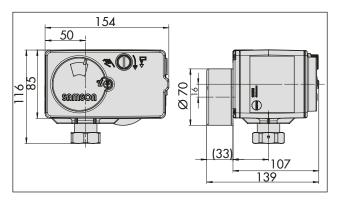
Dimensions in $mm \cdot$ Actuator with faster motor, force-locking attachment
